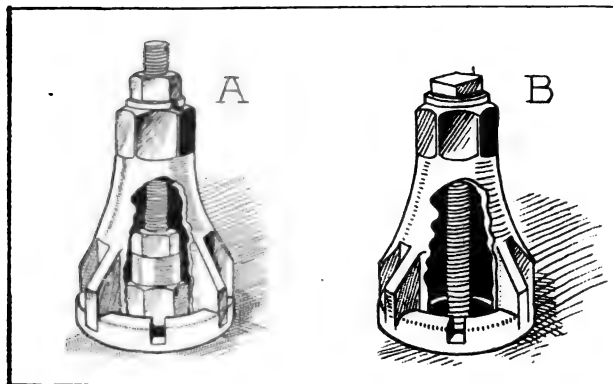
Removing Valve Caps: A, Fitting for Holding Socket Wrench on Intake Valve Cap in Place; B, Fitting for Removing Exhaust Valve Cap.
